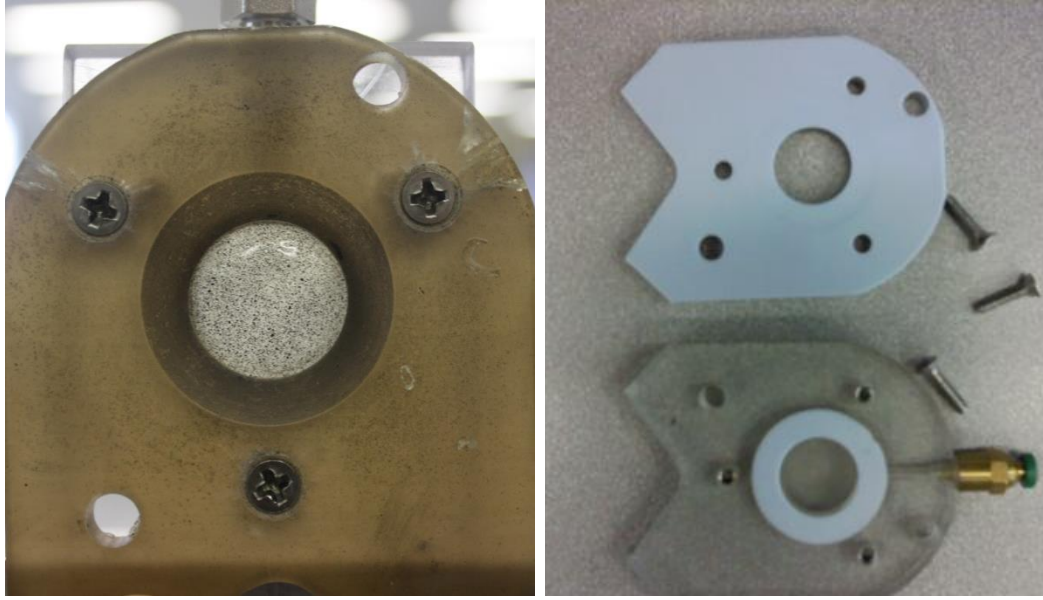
Left: Speckled PFCB/PVDF membrane loaded in blister fixture. Right: Blister fixture disassembled.
